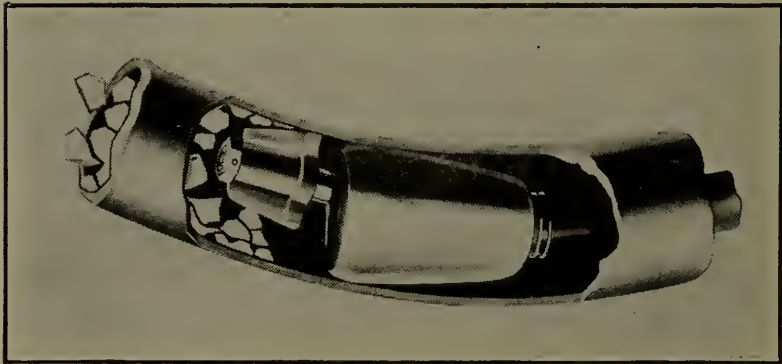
D—'Dean' Boiler Tube Cleaner operating in a Stirling Boiler Tube.
